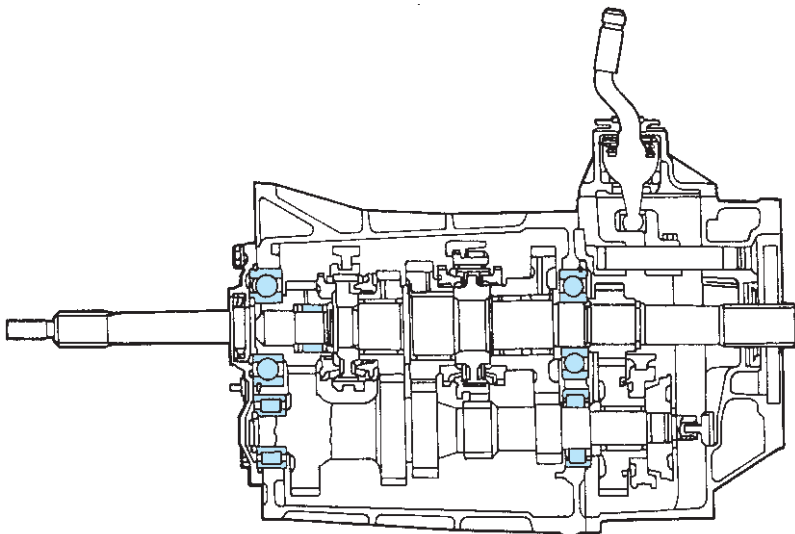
Bearings support the input shaft, countershaft, mainshaft, and speed gears (shaded). (Courtesy of DaimlerChrysler Corporation)
